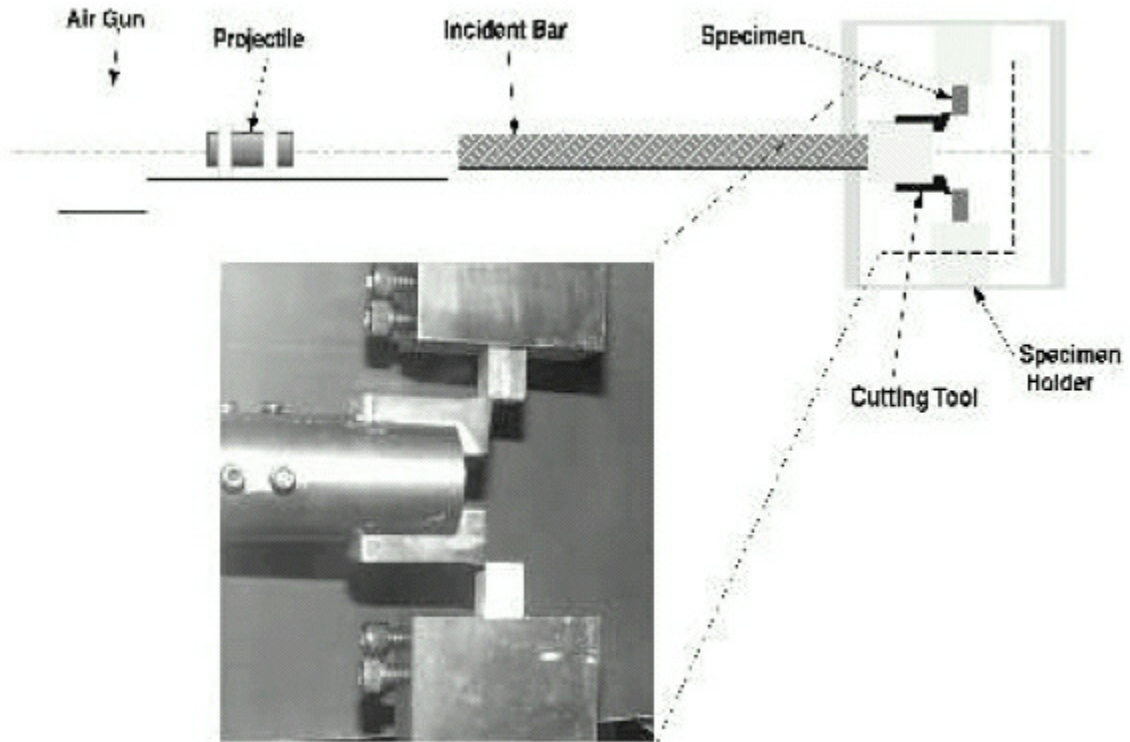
(a) Schematic and a photograph of the orthogonal machining using a modified Hopkinson bar apparatus (after Vernaza-Pena *et al* [24])
